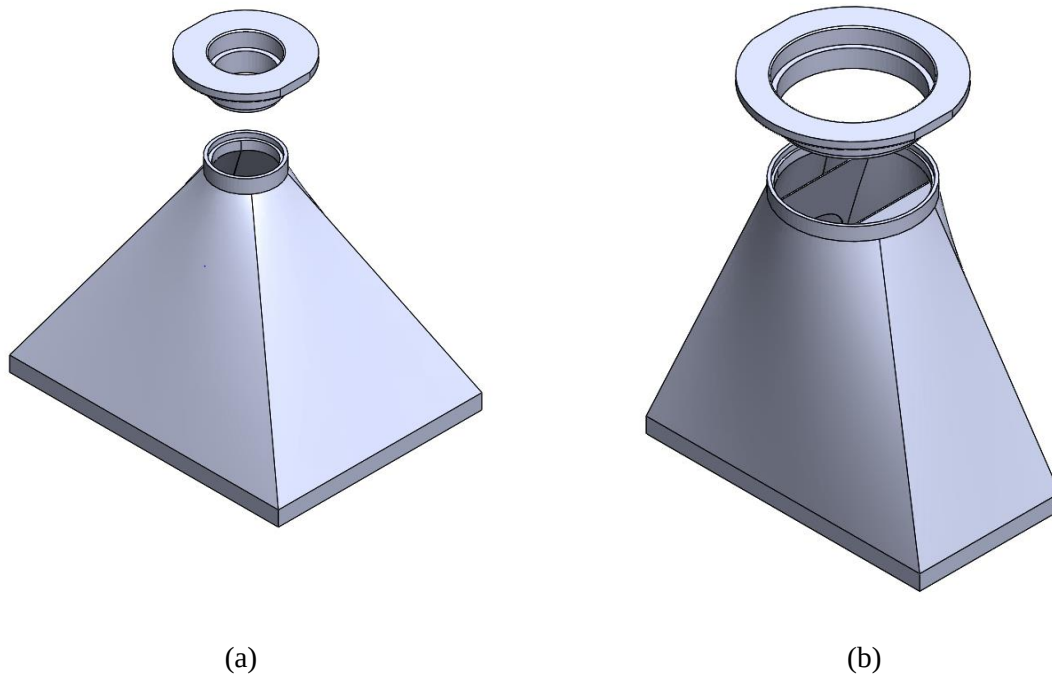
Header and flange design: (a) hot-side (b) cold-side
